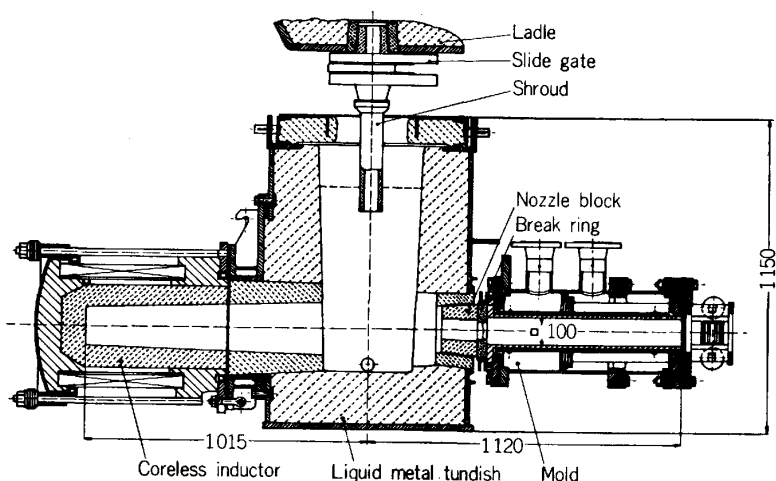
Sectional view of tundish-mold arrangement developed by Krupp⁴⁰⁾.
